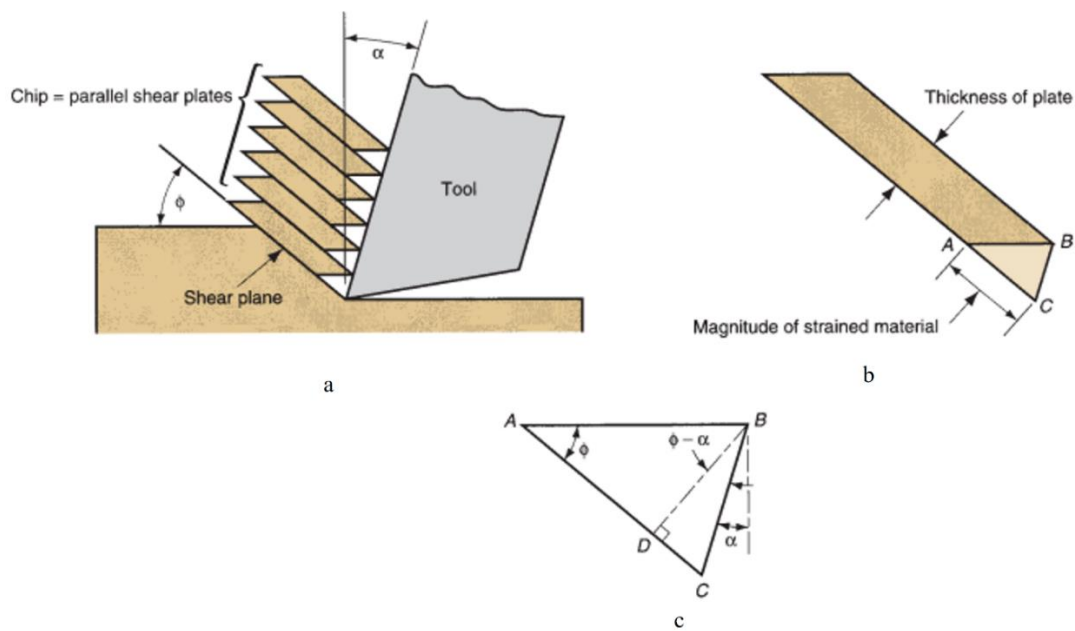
Shear deformation geometry by the cutting tool to form chips (a) Chip formation and shear plane (b) Deformed material segment (c) Shear angle geometry [17]
